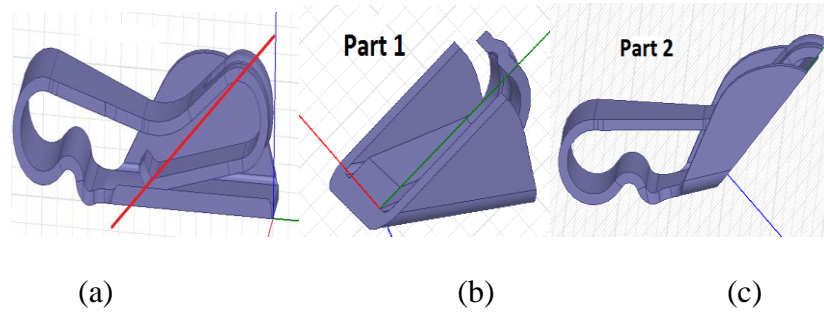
Model of: (a) whole O Clip; (b) One half: part 1; (c) One half: part 2
